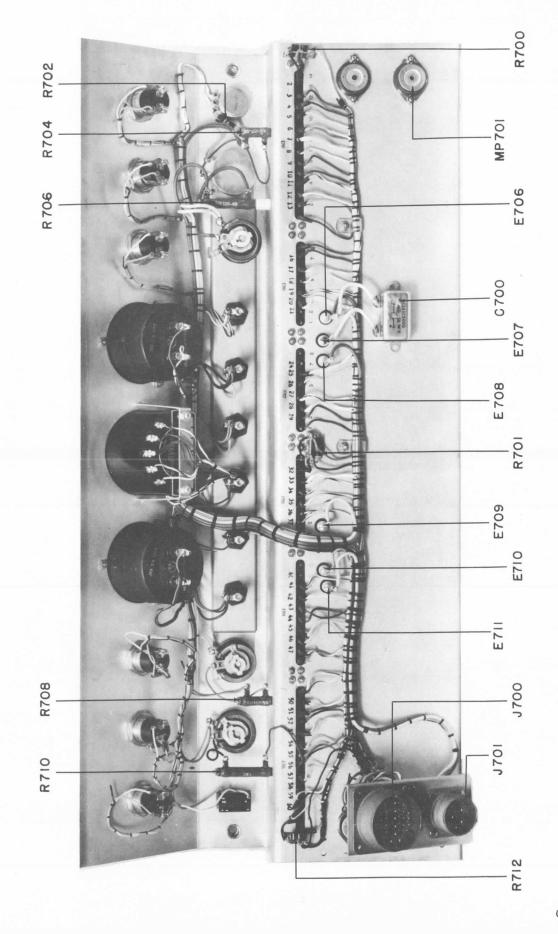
Rear View, Relay and Indicator Control Panels
